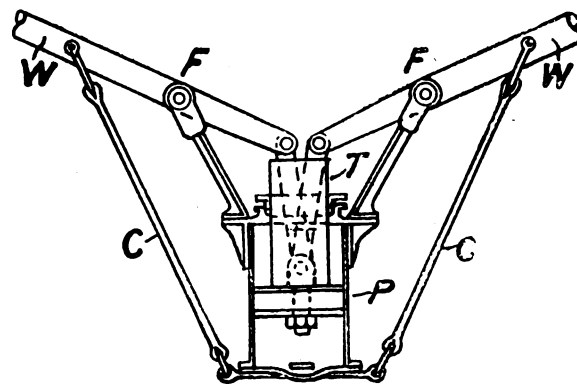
HOLLANDS' RECIPROCATING STEAM TRUNK MOTOR (for Winged Aviators),
